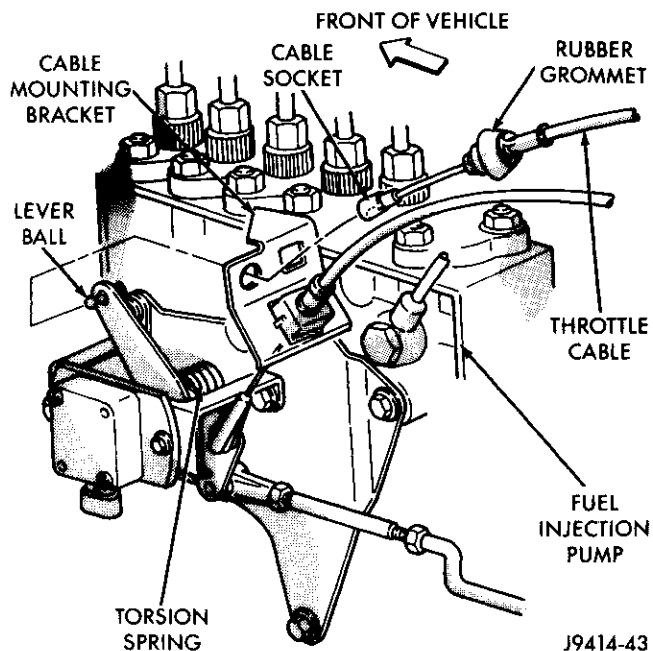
Diesel Throttle Cable at Injection Pump—Typical
